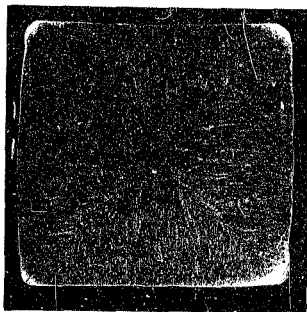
Transverse Section of a Mild Steel Billet showing only a Columnar Zone
